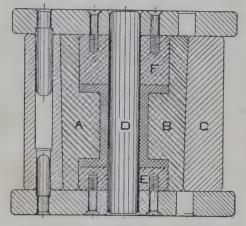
Spool mold (split cavity). (Courtesy of Bakelite Corporation.)
